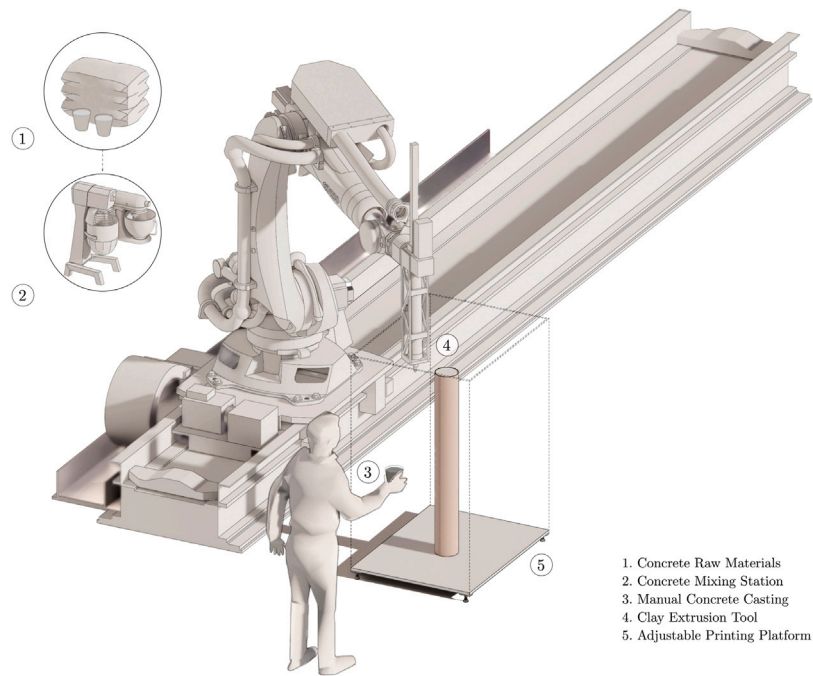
Fabrication setup utilizing a 6-axis robotic arm with clay extruding end effector.
